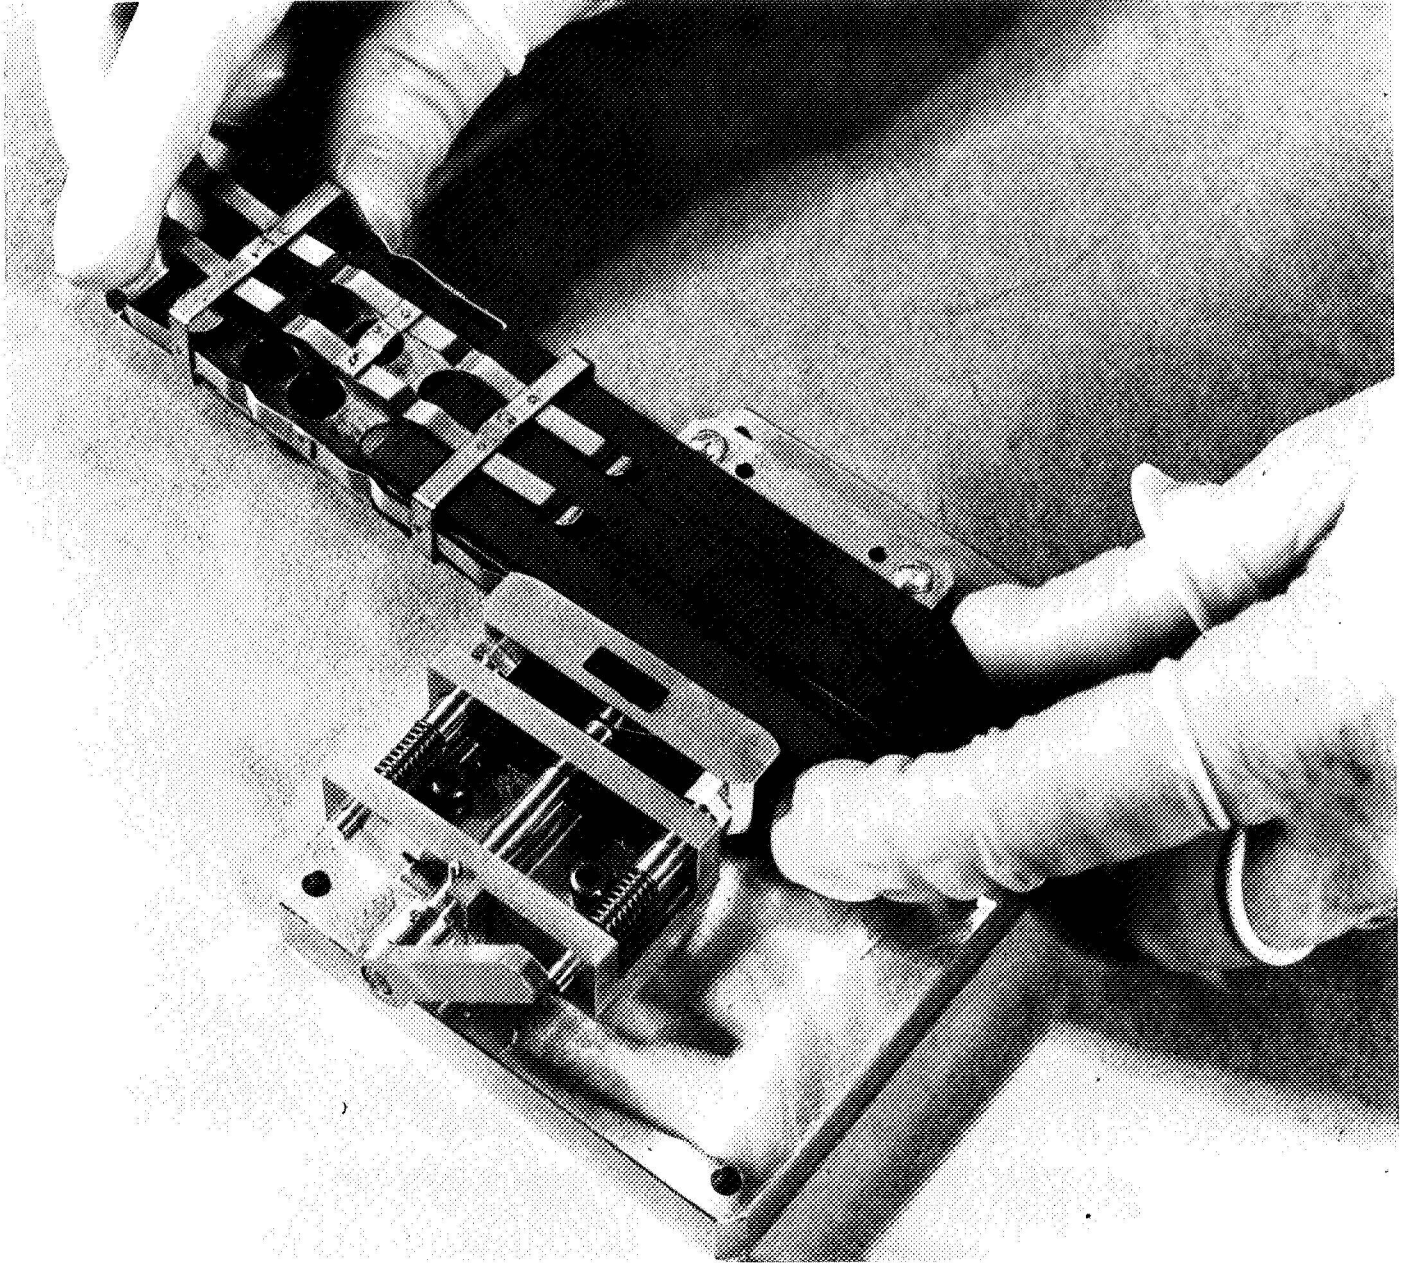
Solar cell submodule soldering fixture in final assembly stage
